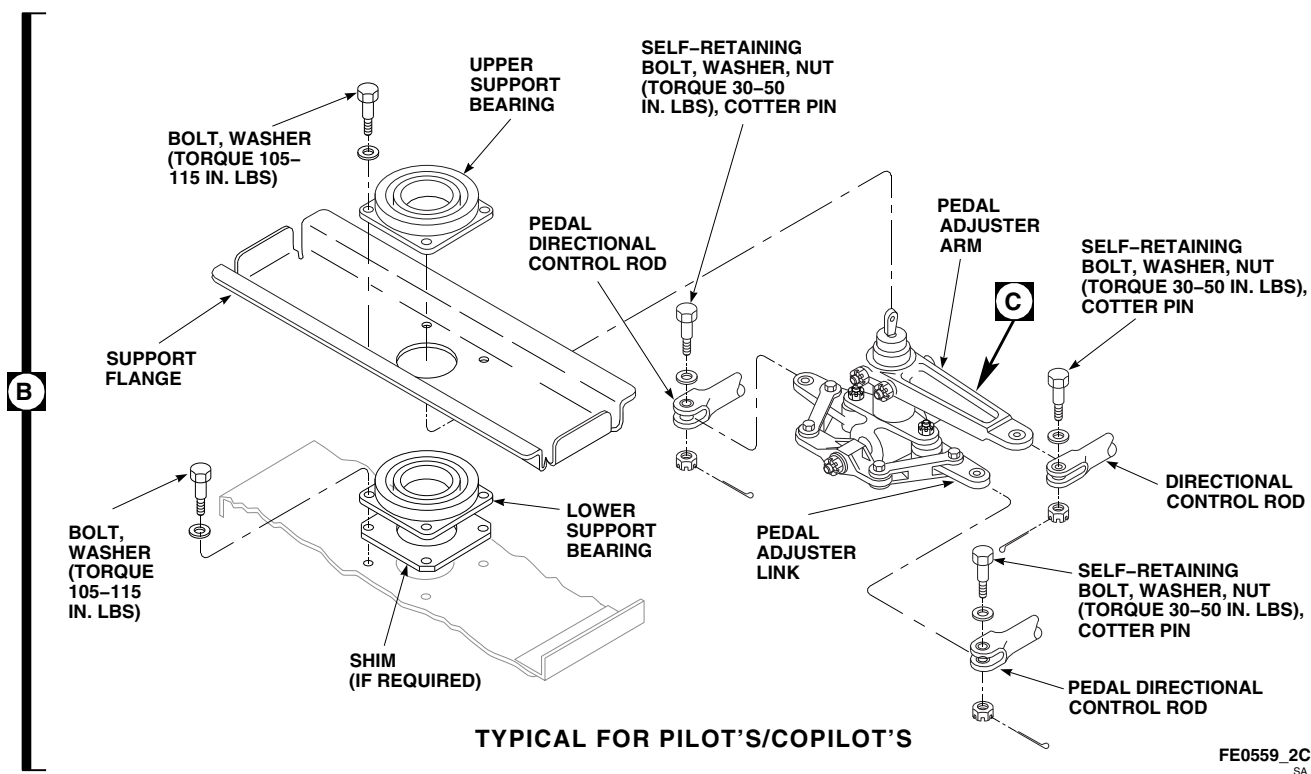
REPLACE YAW CONTROL PEDAL ADJUSTER (SHEET 2 OF 3)
